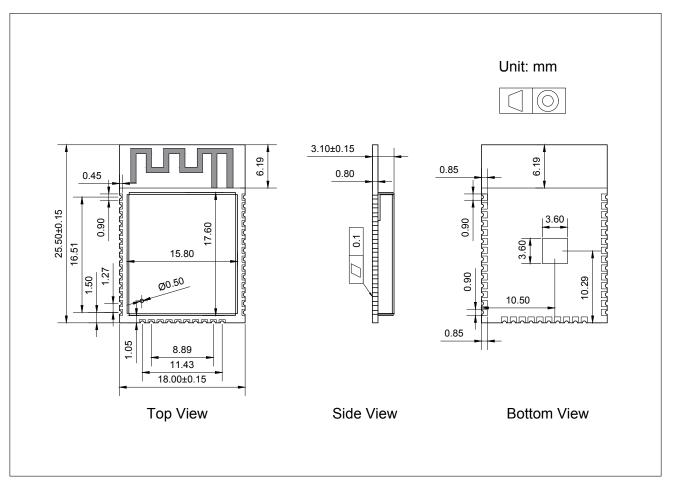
Physical Dimensions of ESP32-WROOM-32D
